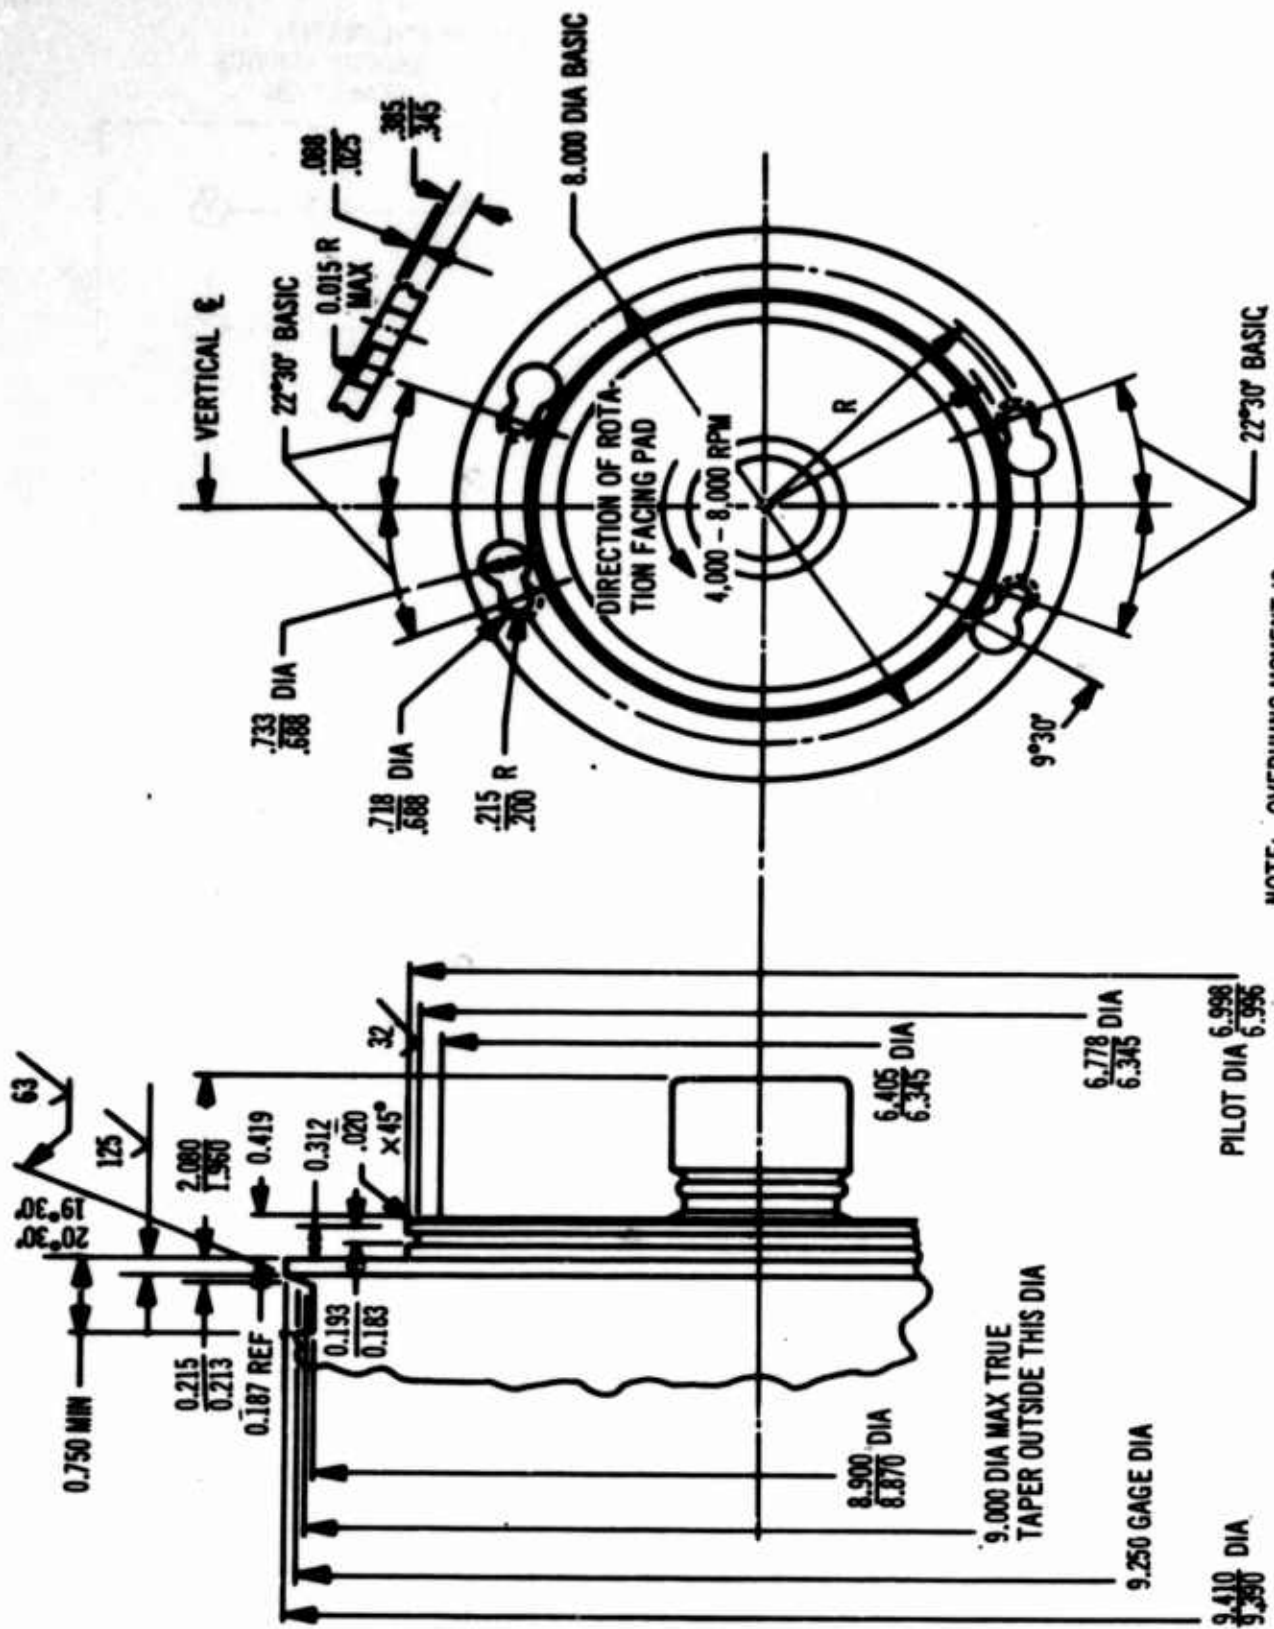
Quick-Attach-Detach (QAD) Pad on Starter
